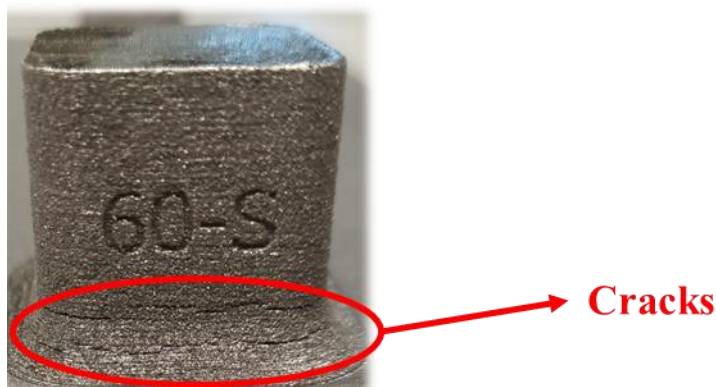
Cracks and delamination detected on preheated 60-S scanning strategy specimen
